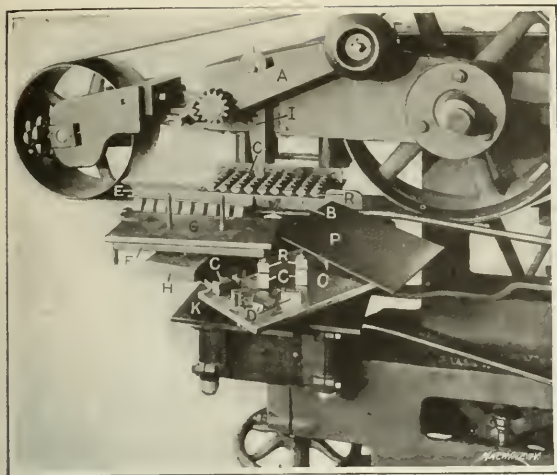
Close View of Mechanism of Blevney Finishing Machine
